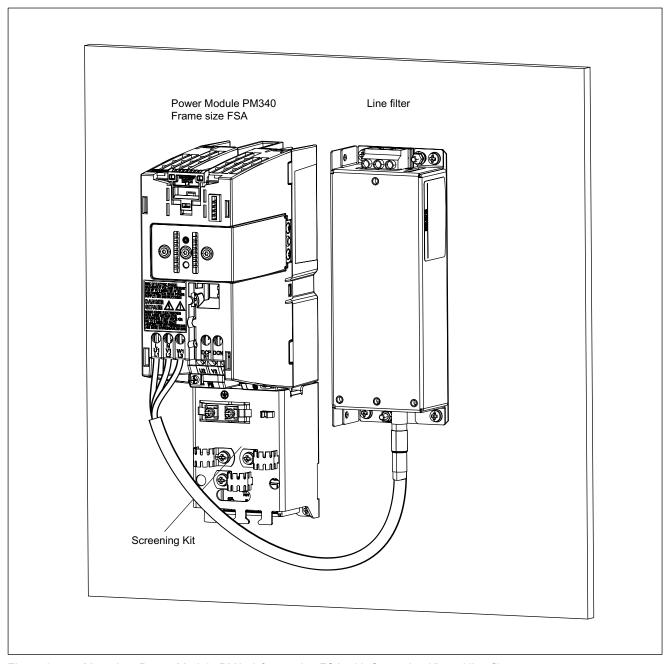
Mounting: Power Module PM340 frame size FSA with Screening Kit and line filter
